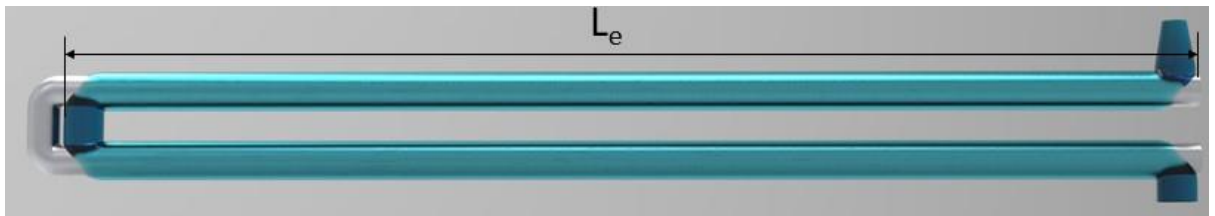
Schematic of U-shape Tubular Heat Exchanger model (front view)
